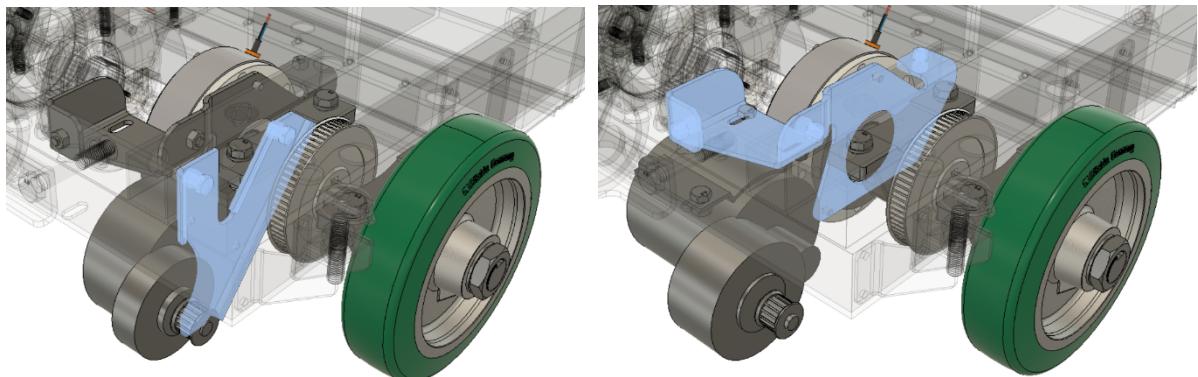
Motors and brake brackets, vertical (left) and horizontal (right) flanges.
